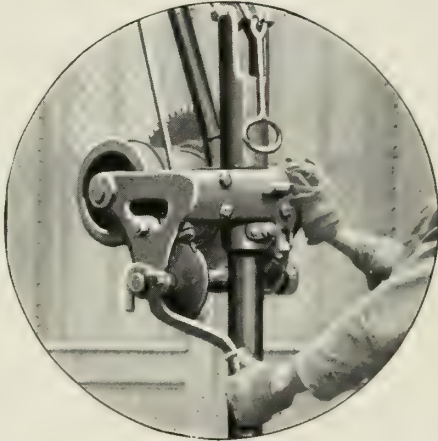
AUTOMATIC GEAR SHIFTING BRAKE DEVICE IN OPERATION, MODEL B HOIST
